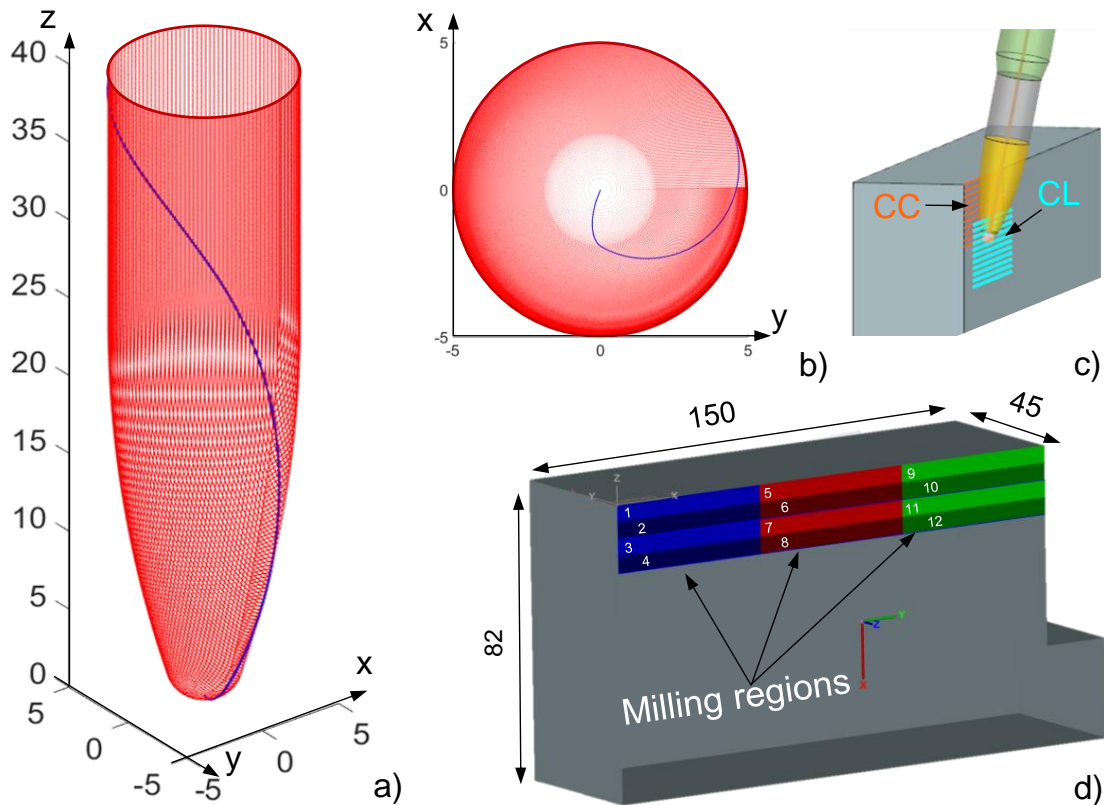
Tool and workpiece schematics: a) oval barrel tool; b) tool top view; c) CAM programming schematic; d) workpiece dimensions and milling regions.
